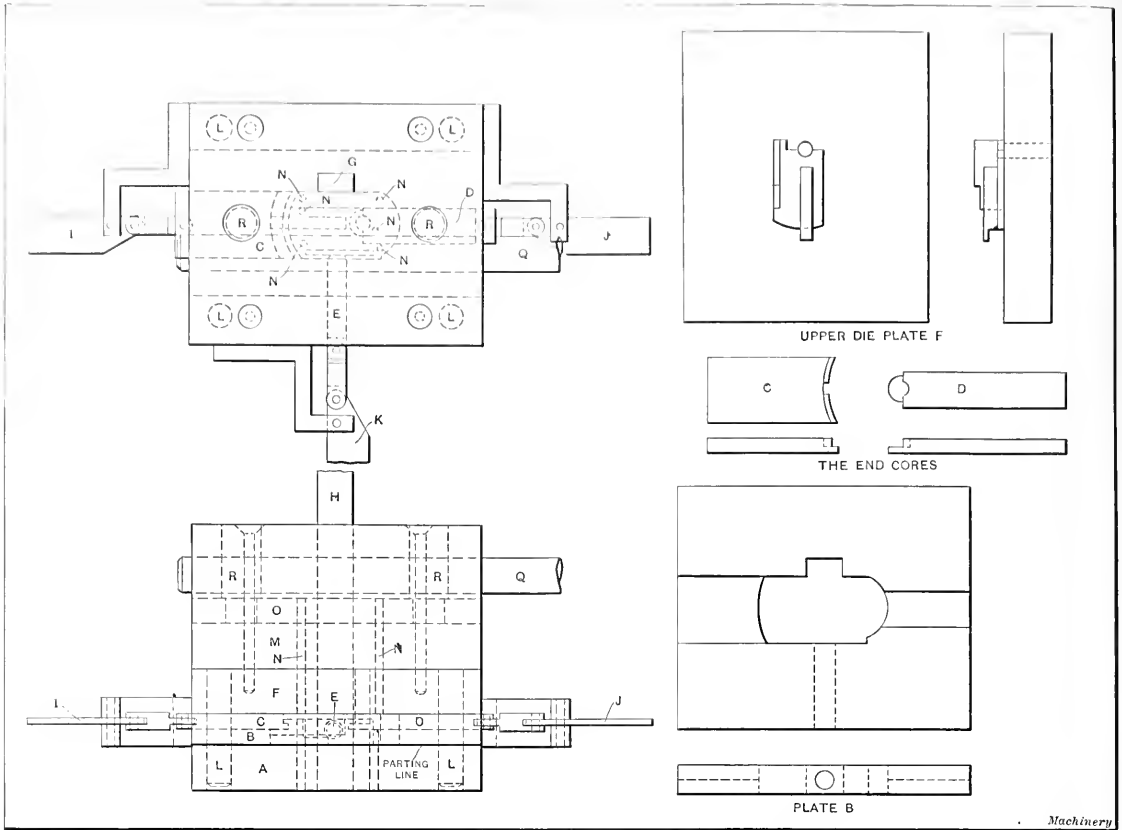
Die-casting Mold for the Lens Chuck Base shown at C, Fig. 9
